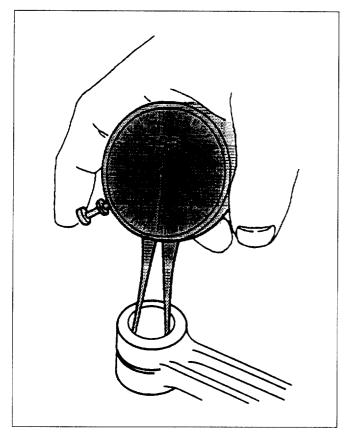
Measuring Piston Pin Bushing Inside Diameter
